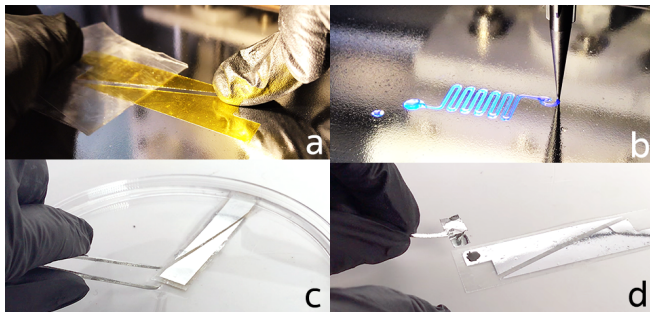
Circuit Fabrication: (a) Coating manually; (b) Coating robotically; (c) Etching in 2 mol/L NaOH Solution; (d) Cold soldering
